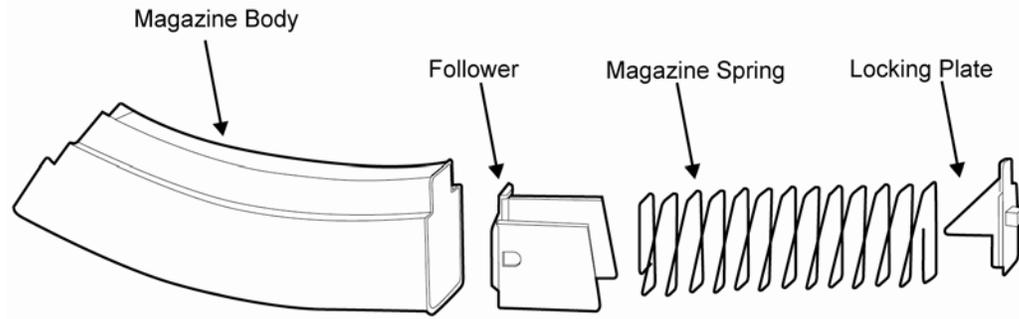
Inserting the Follower, Magazine Spring, and Locking Plate into the Bottom of the Magazine Body.
